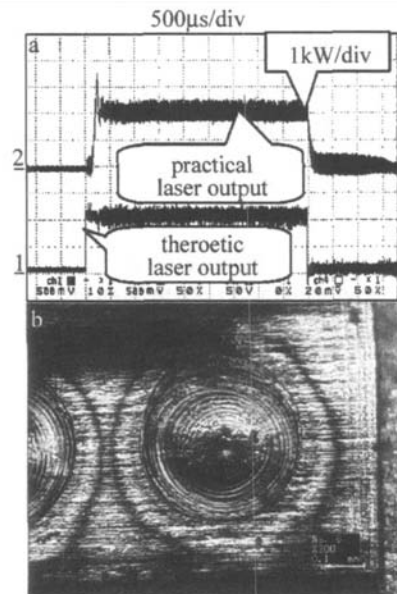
Square laser power wave and its laser welding spot photograph
